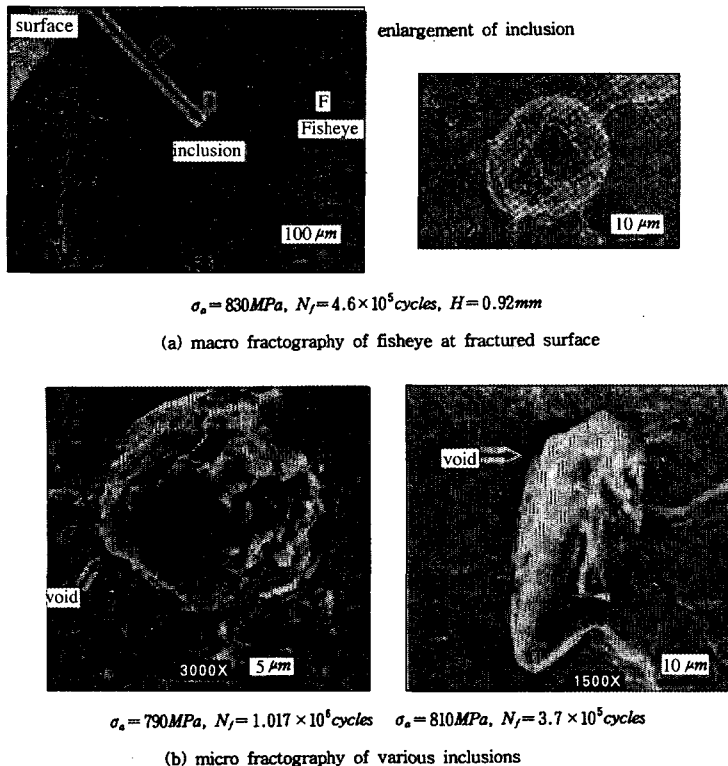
Fractured surface of carbonitriding in case of fatigue crack initiated at interior inclusion
